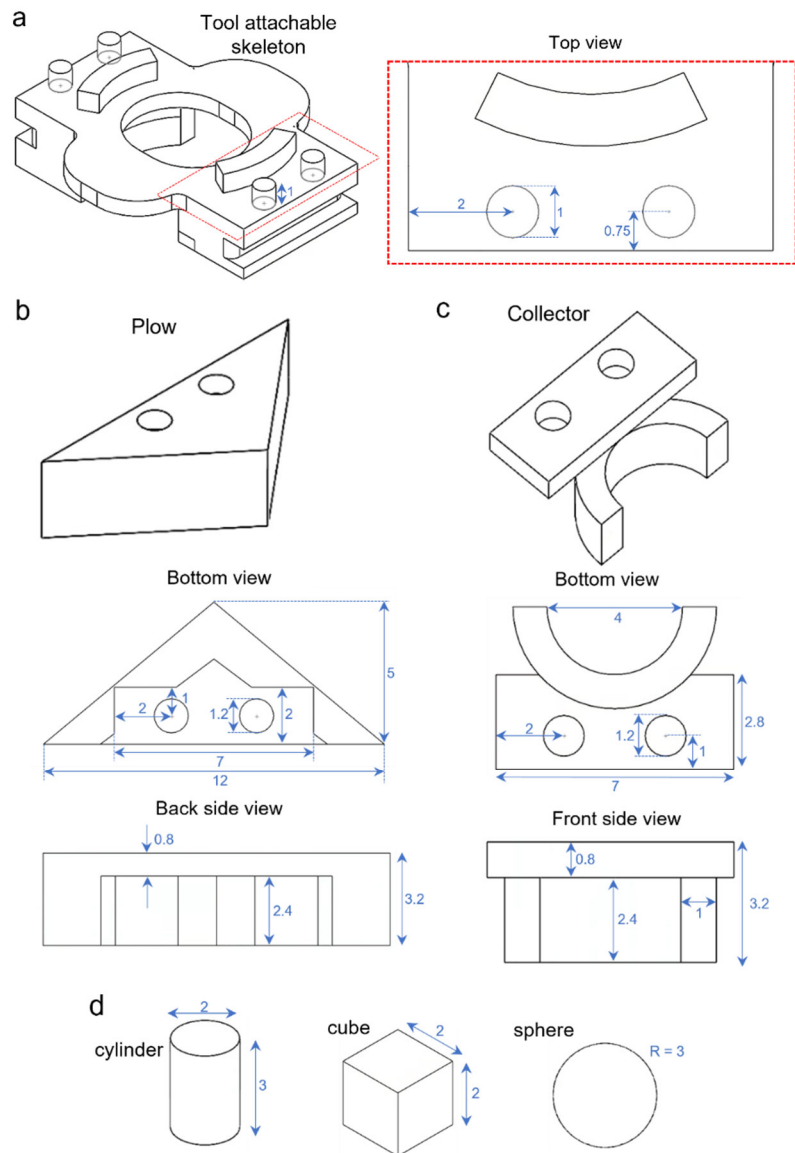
Designs of tool attachments for functional eBibot using Lego® like assembly. CAD with dimensions for (a) tool attachable skeleton for functional eBibot, (b) plow, (c) collector, and (d) obstacles used in Fig. 5, movie S8 and S9. Units: mm.
